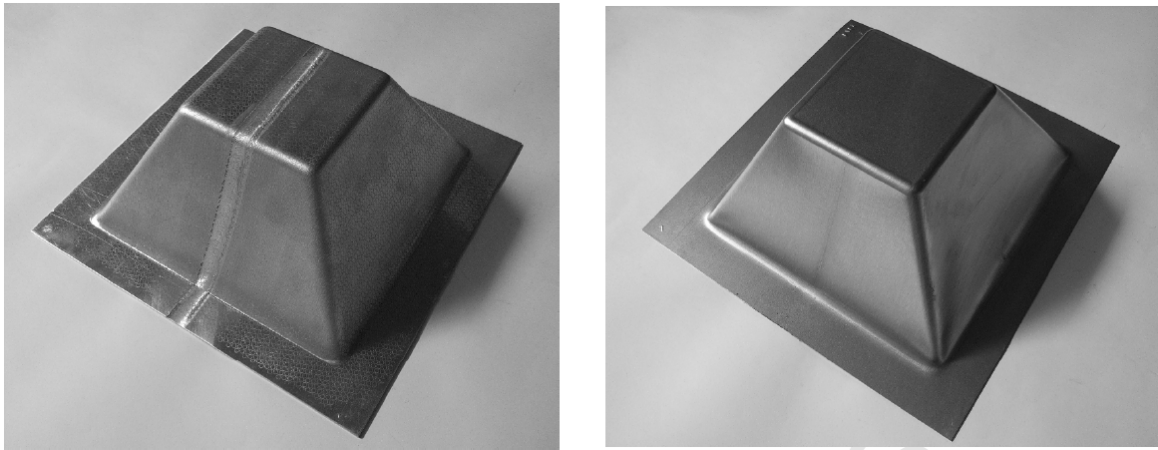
Right: 60° pyramid with friction stir welding without fracture, left: steel dummy used during forming [43]
